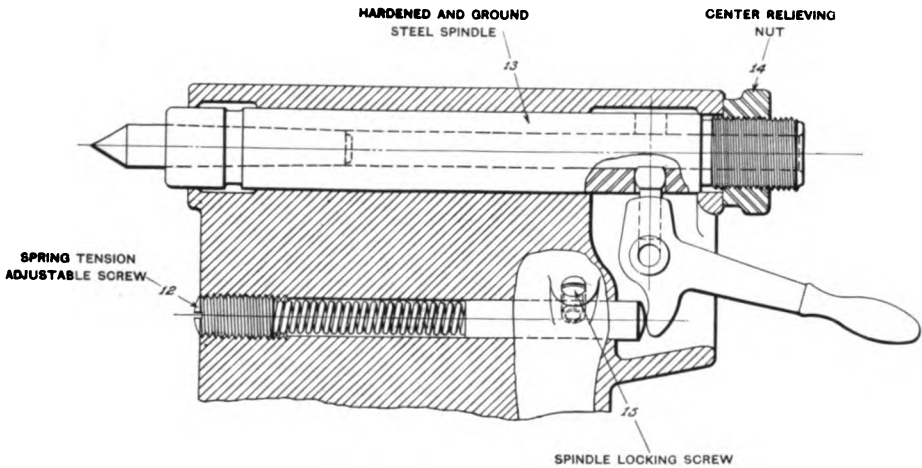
Section Through Footstock Spindle—Small Universal and Plain Machines
